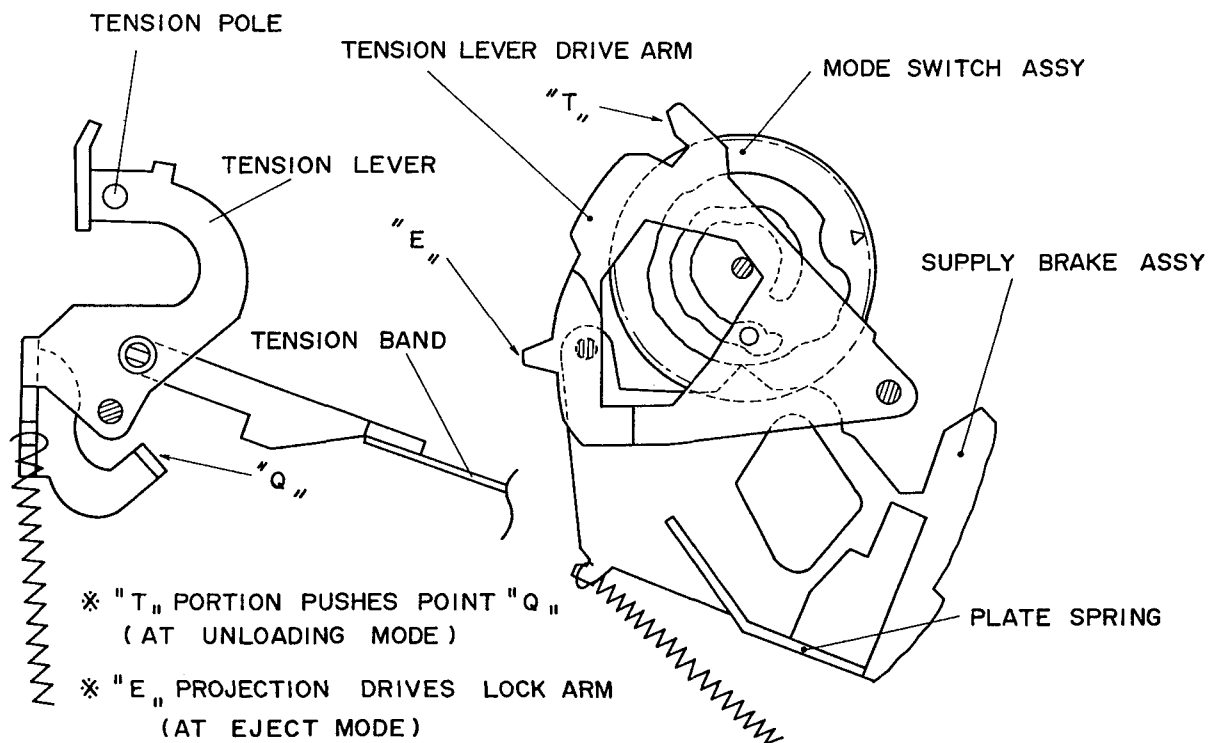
Tension Lever/Supply Brake Drive Mechanism (Top View)
